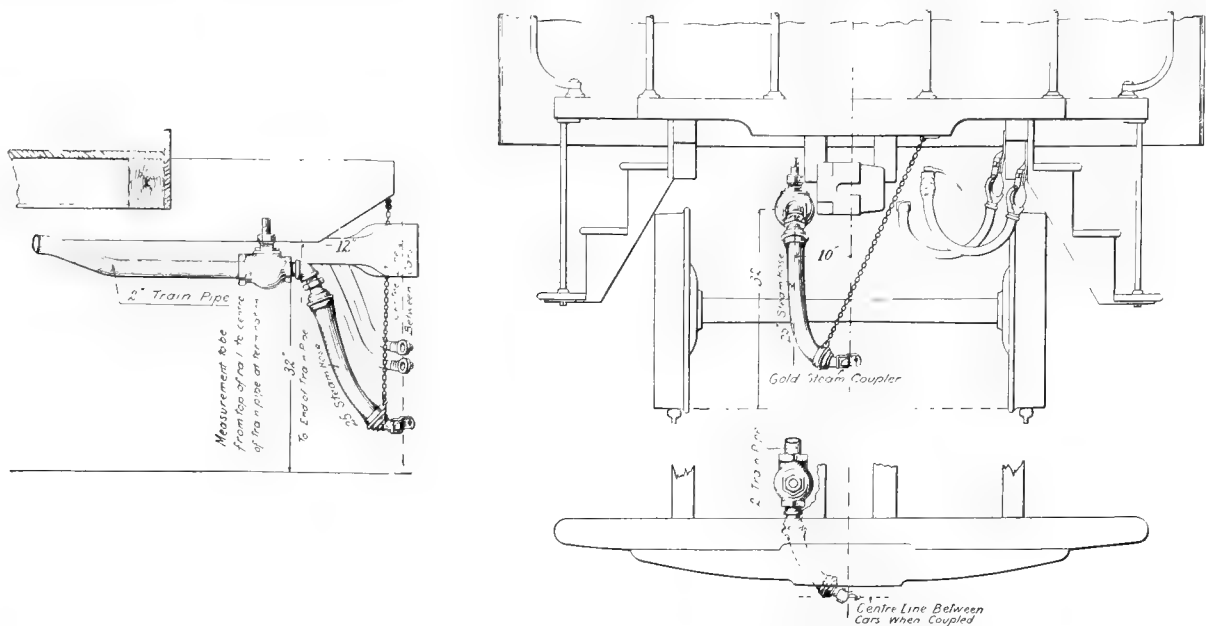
Proper Location of End Valve and Steam Hose Coupler.
